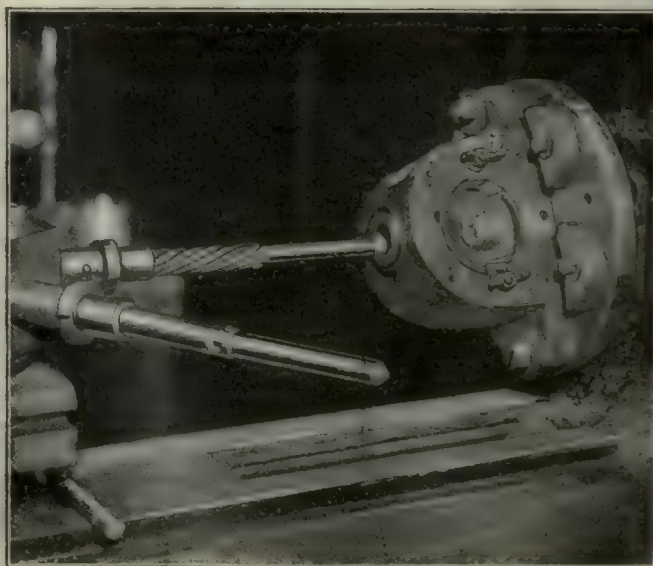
FINISH-BORING PISTON-PIN HOLE
